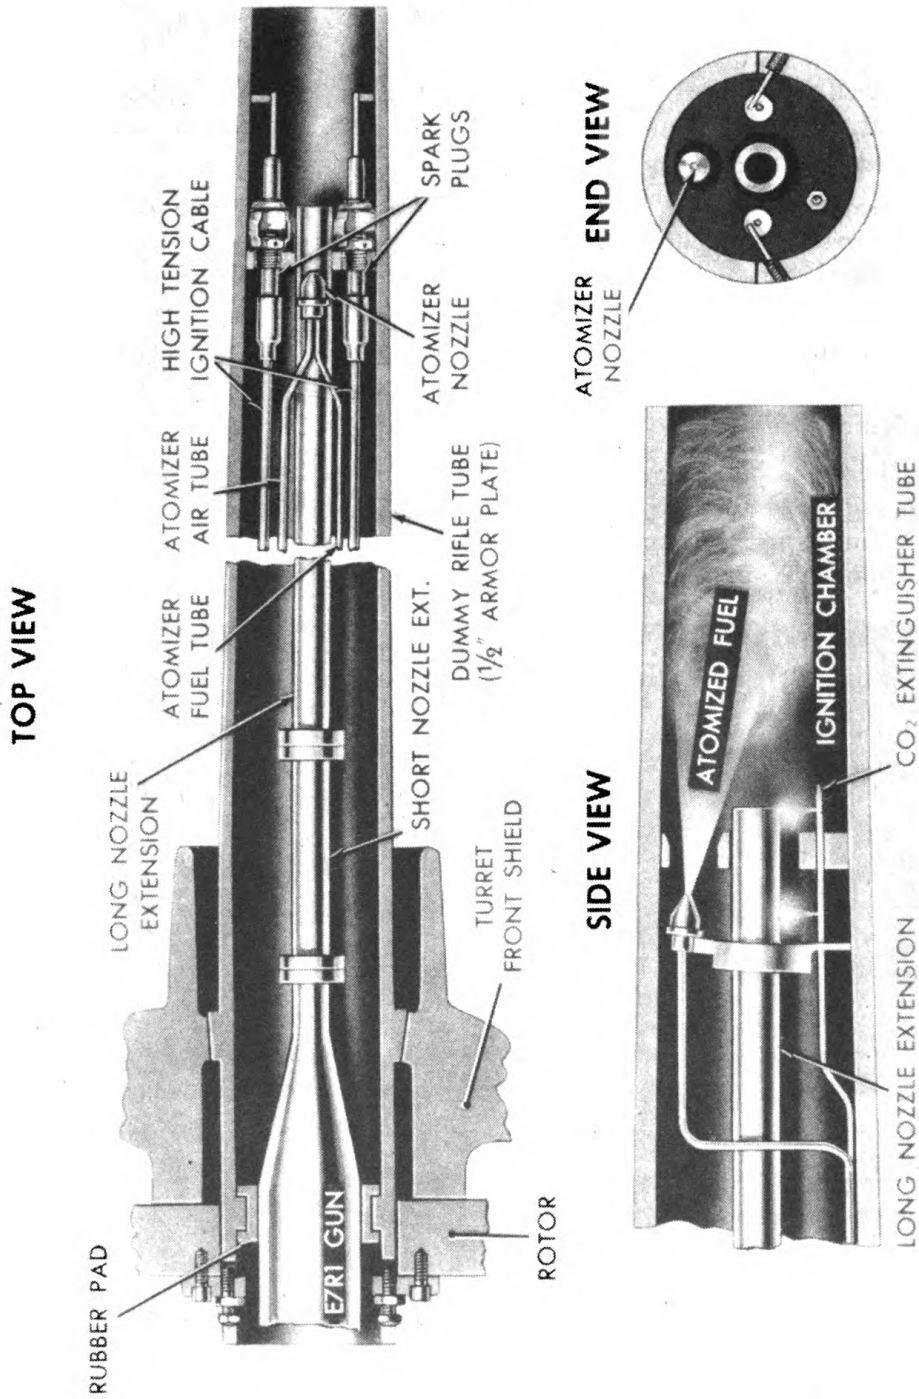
Ignition chamber at front of dummy 75-mm. rifle tube (schematic views).
